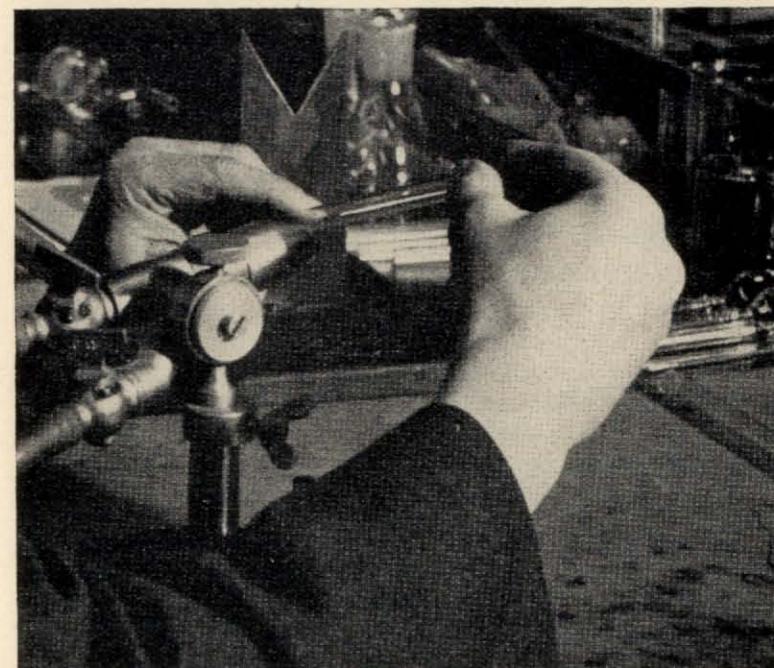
THE POSITION OF THE HANDS FOR DRAWING A "POINT"
